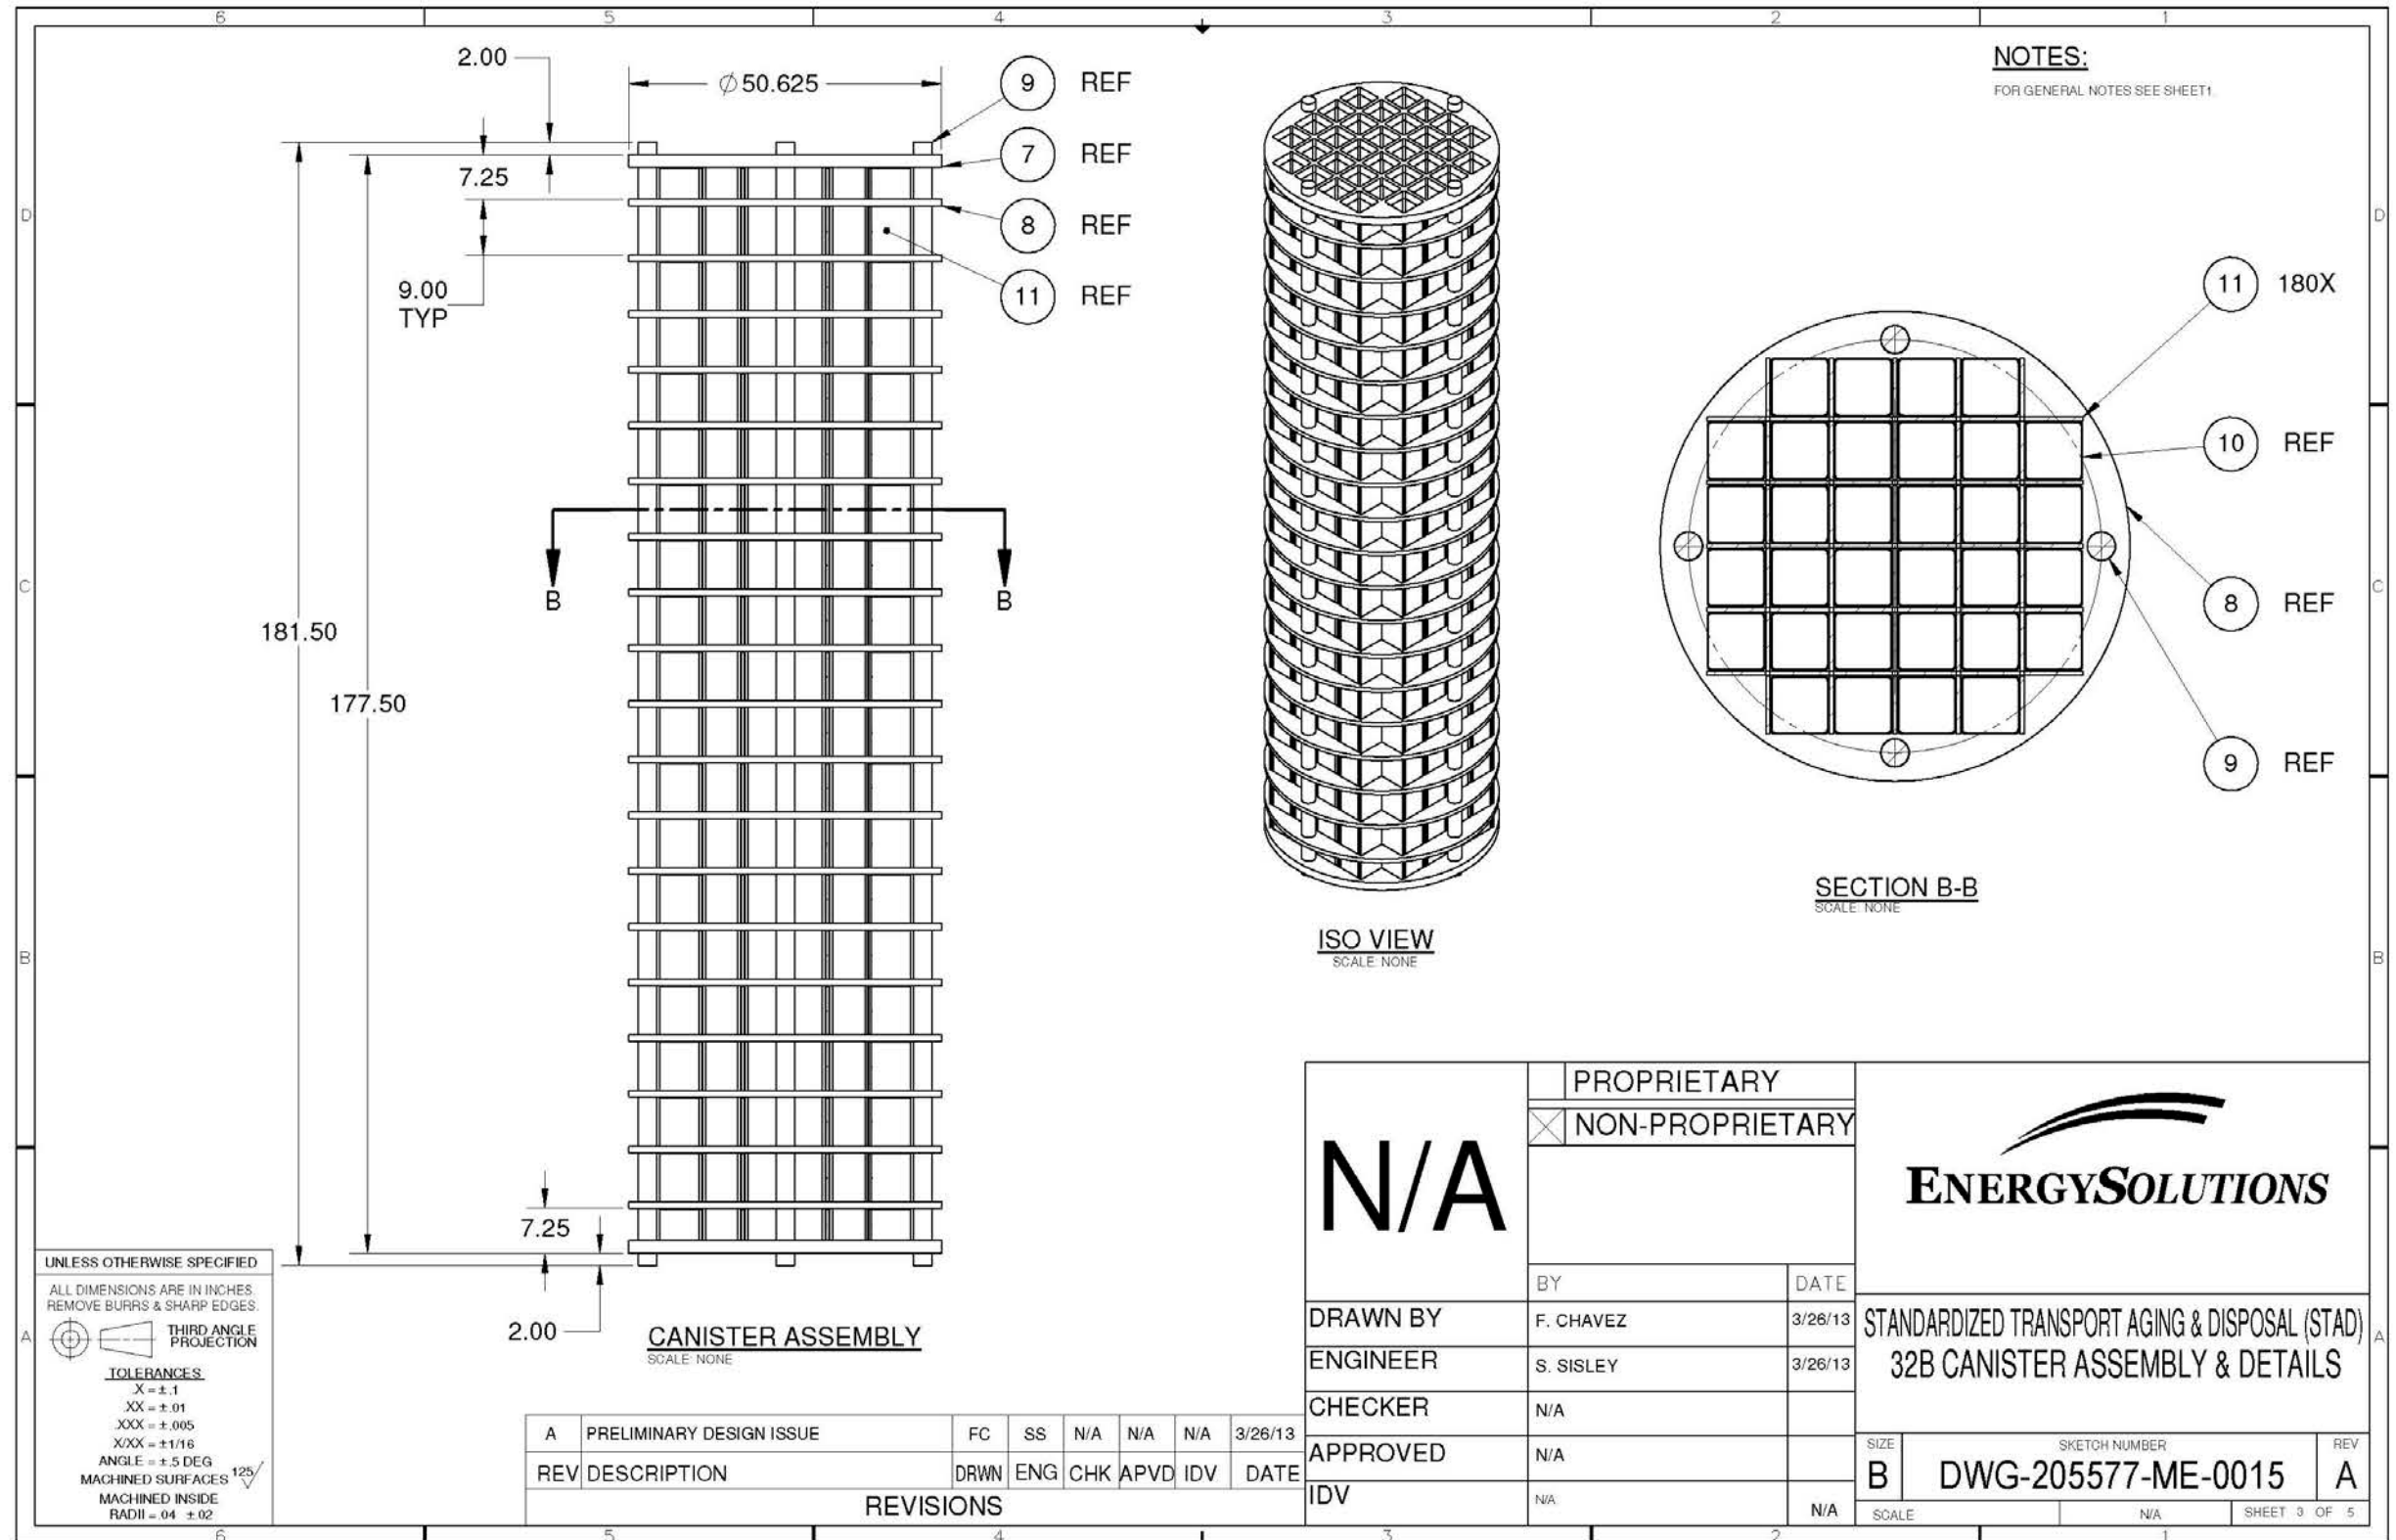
Standardized Transport, Aging and Disposal Canister - 32 BWR Assemblies - Assembly & Details – Sheet 4 of 5
